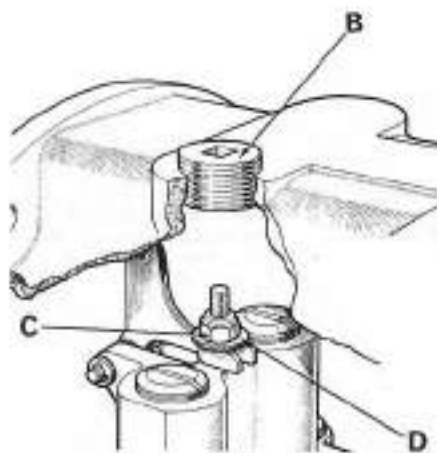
Cut-away view showing pump control valves within PTO housing. Adjusting nut (C) and washer (D) are accessible after removing plug (B). Refer to text for adjusting procedure.
